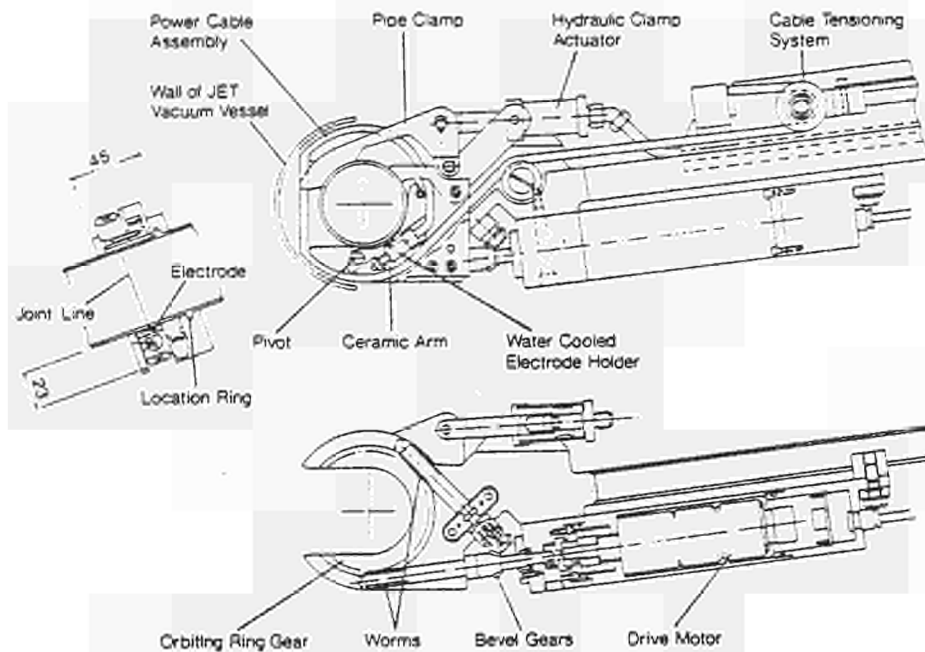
$\phi 50$ external orbital TIC welding tool
